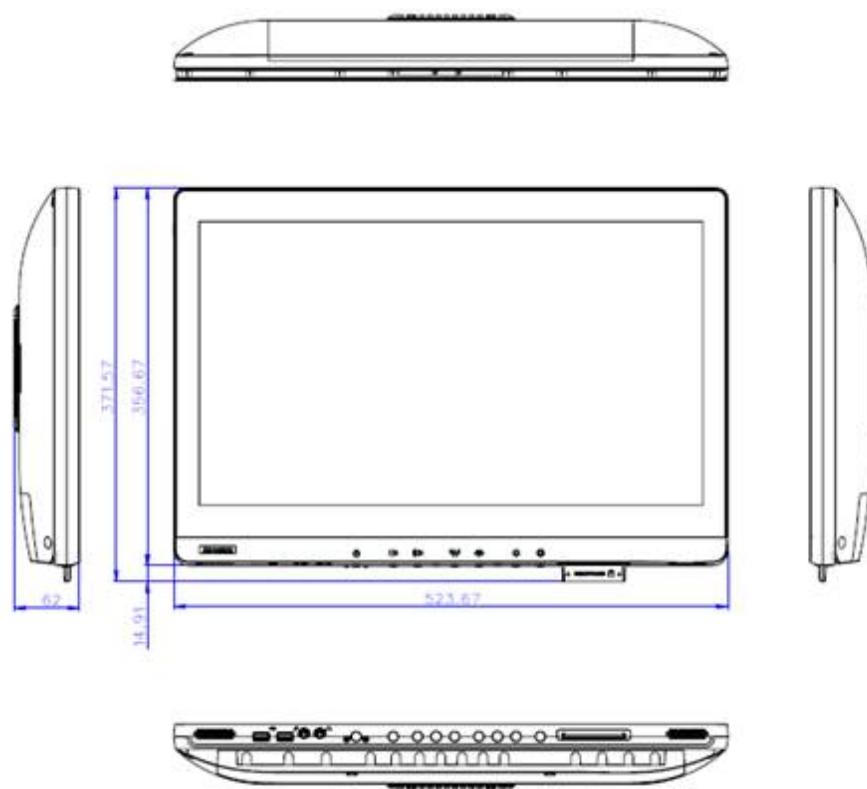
POC-621 with Smart Card Reader Dimensions
